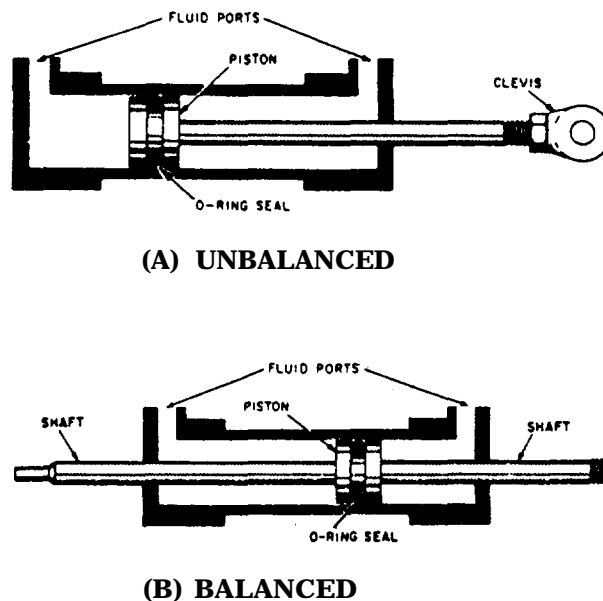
Double-acting, piston-type actuating cylinders.
